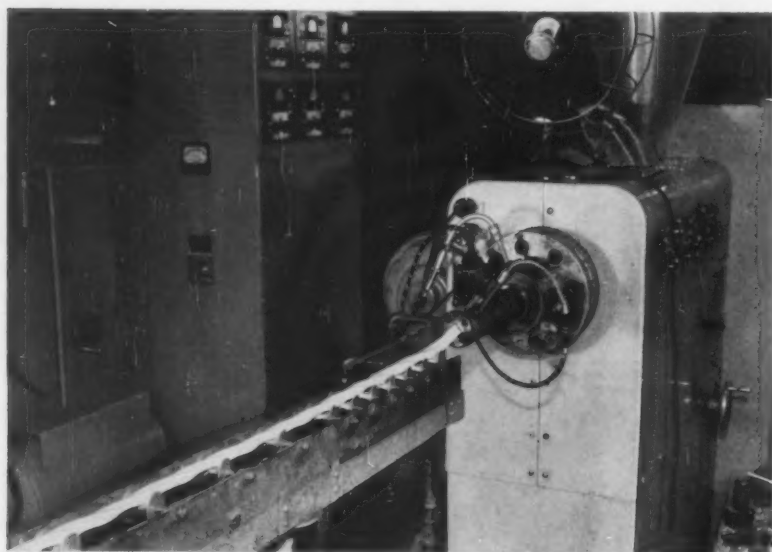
Close-up of extruder producing spiral rod of rectangular section. As the rod emerges from the die, it is twisted by hand until it reaches the pull rolls (see below)
